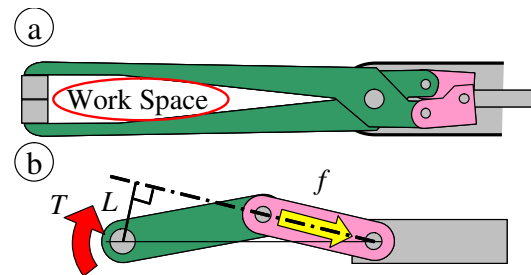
Gripper with a traditional linkage mechanism (Gripping)
